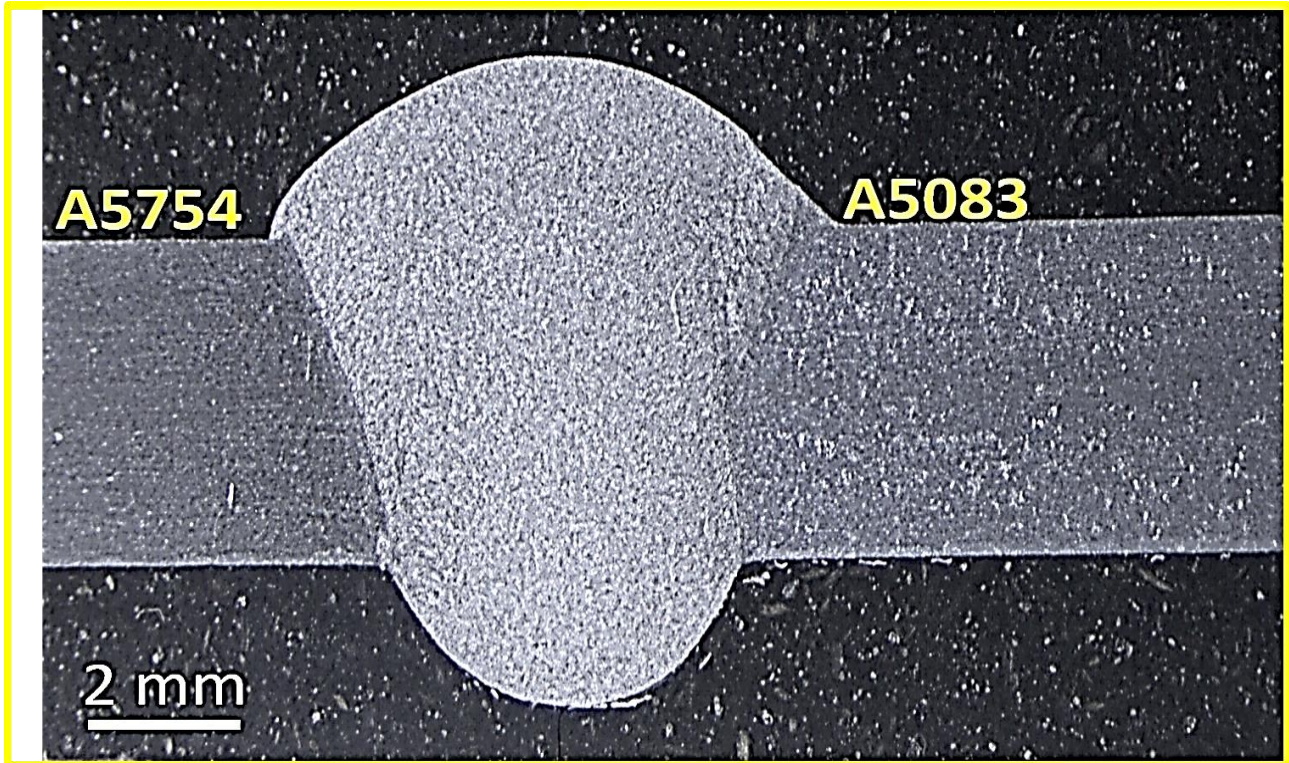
Macroscopic cross-sectional view of the CMT welded A5754-H111 and A5083-H111 joint using ER5356 filler wire
